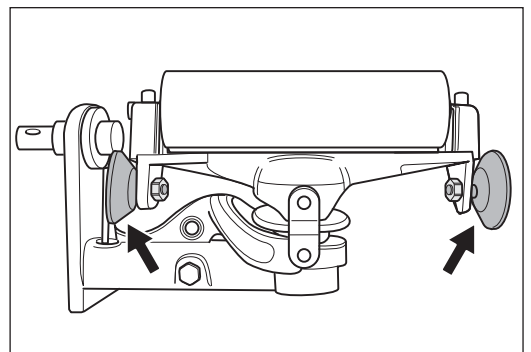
The two guide rollers must be rotatable easily! Otherwise they must be replaced! Similar to figure.
